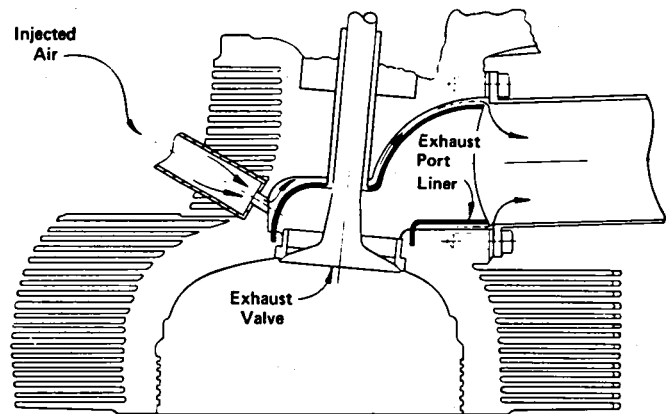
A - Cross sectional view of IO-520 cylinder head with exhaust port liner scavenging design.
